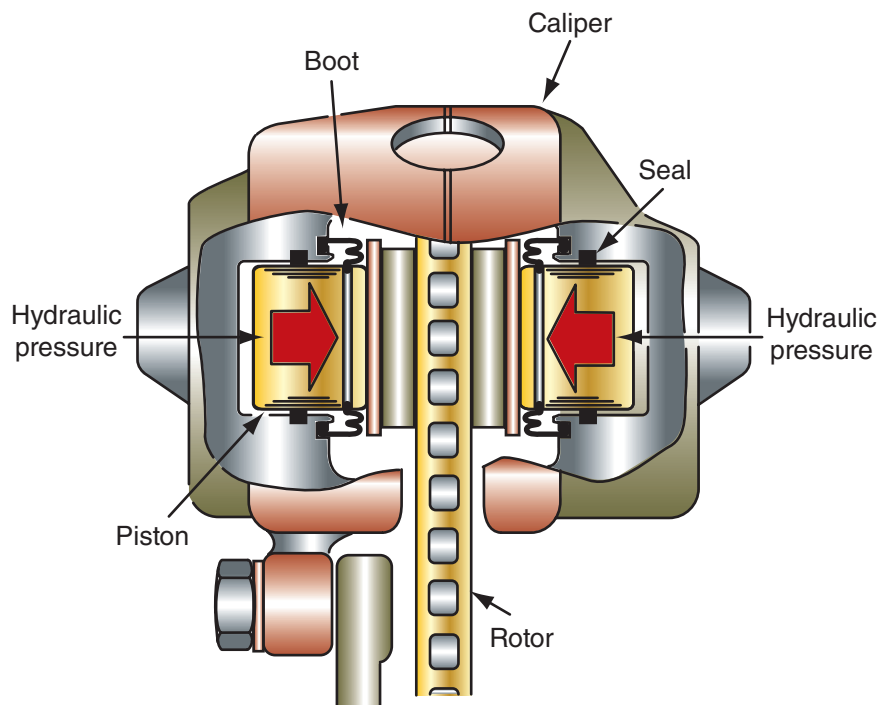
The caliper of a fixed caliper assembly is bolted in a fixed position and does not move when the brakes are applied.
